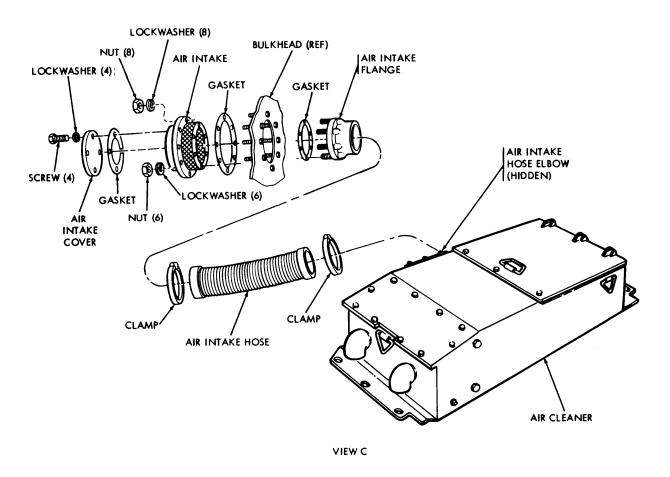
Air cleaner hoses, air intake gaskets and screens replacement (sheet 1 of 2).
